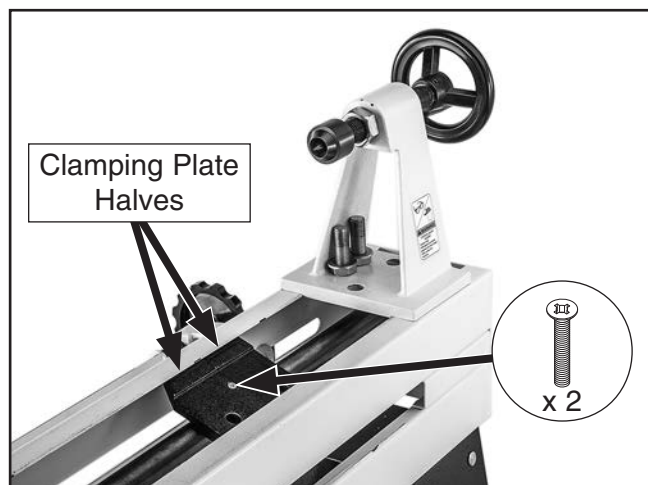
Location of tailstock clamp bolts and clamping plate.
